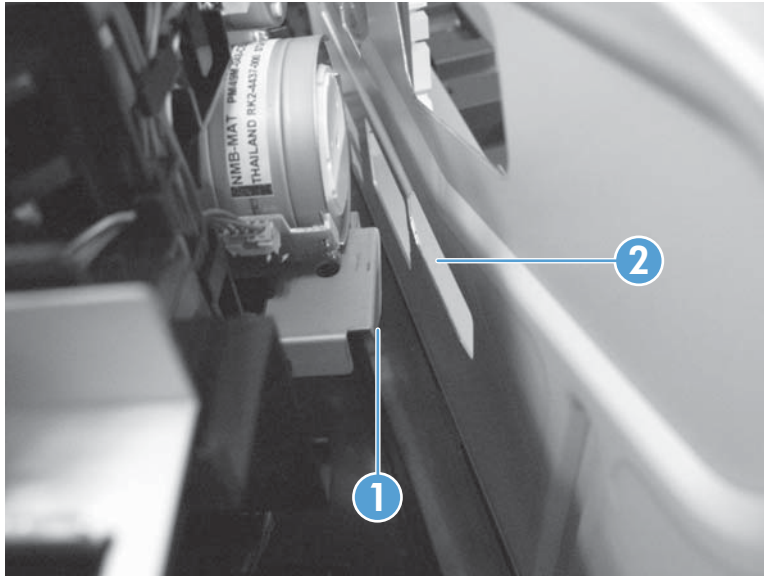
Stapler/stacker alignment assembly chassis slot
